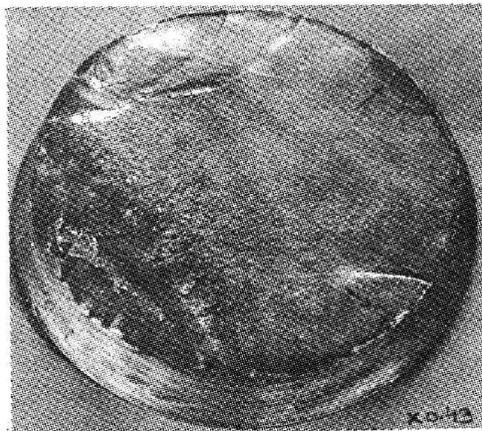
Macrograph view of failed axle showing signs of fatigue failure x 0.75
